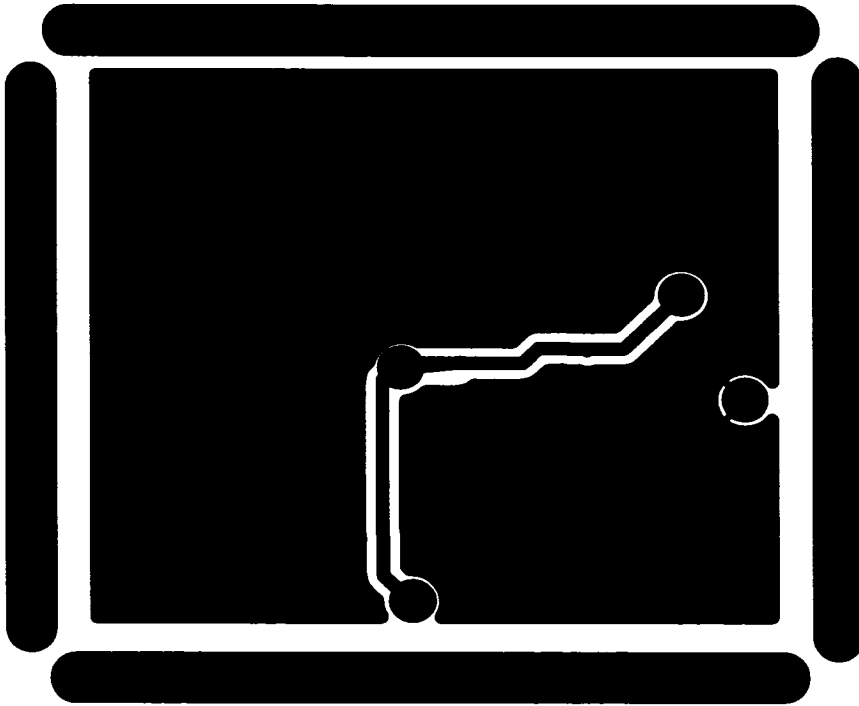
DC/DC Converter PCB Layout (Top Layer)
